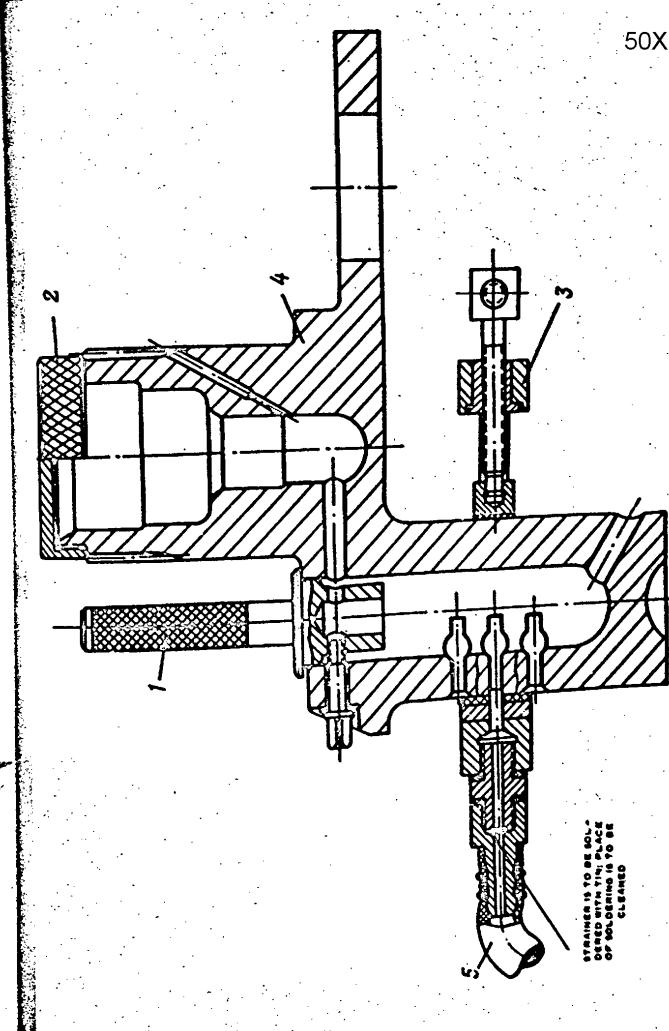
APPLIANCE FOR FLUSHING CRANKSHAFT REAR PART OIL DUCTS
